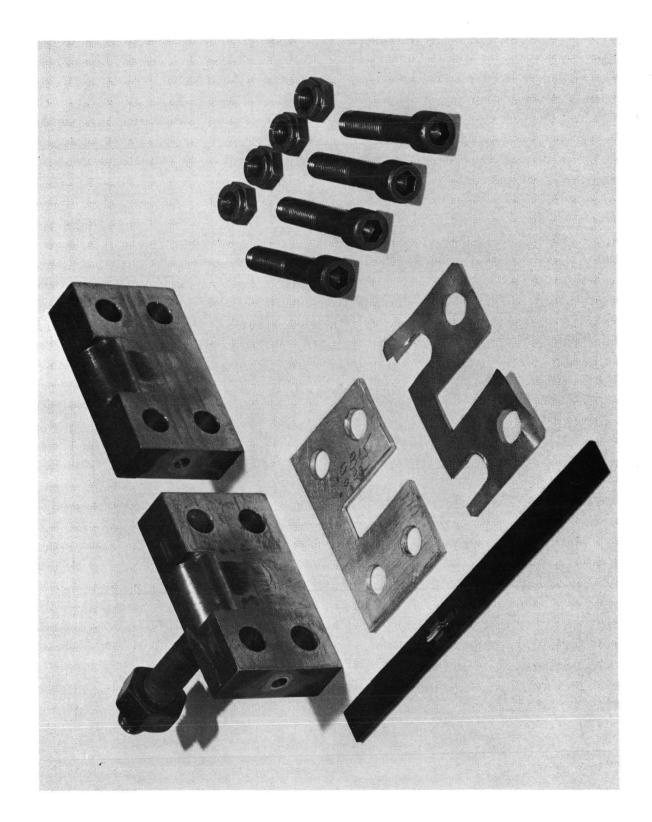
SPECIMEN HOLDING FIXTURE
